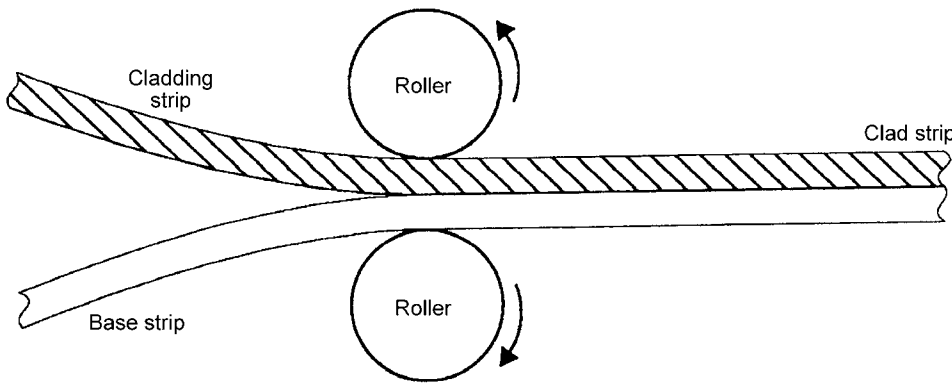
Schematic illustration of the roll welding process producing clad metals or bimetal strips of sheet. Source: Ref 5
